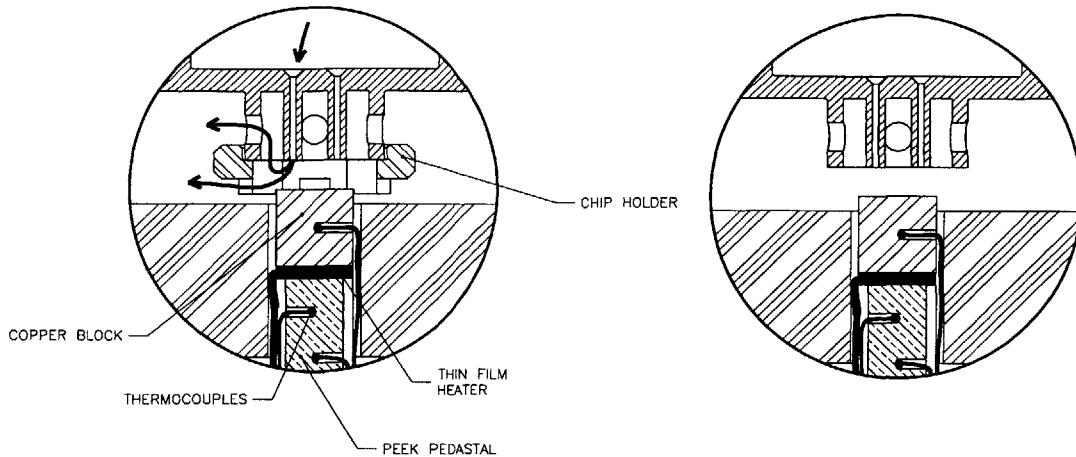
Detailed view of the heater section of the nozzle test assembly. Views are shown with and without a device holder.
